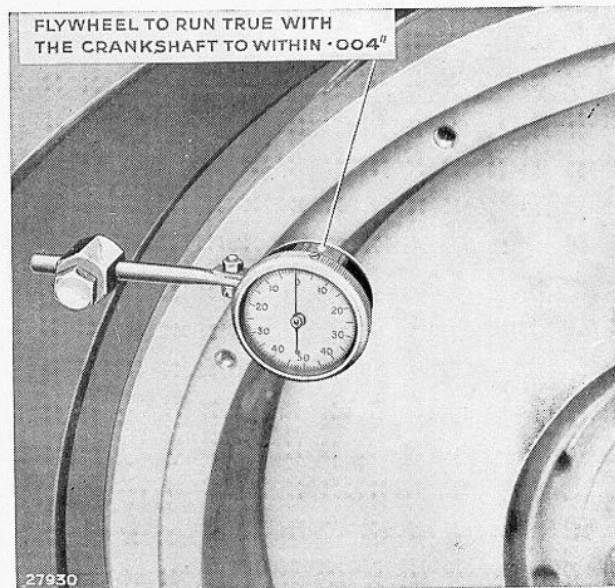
CHECKING FLYWHEEL FOR RUNNING TRUE
